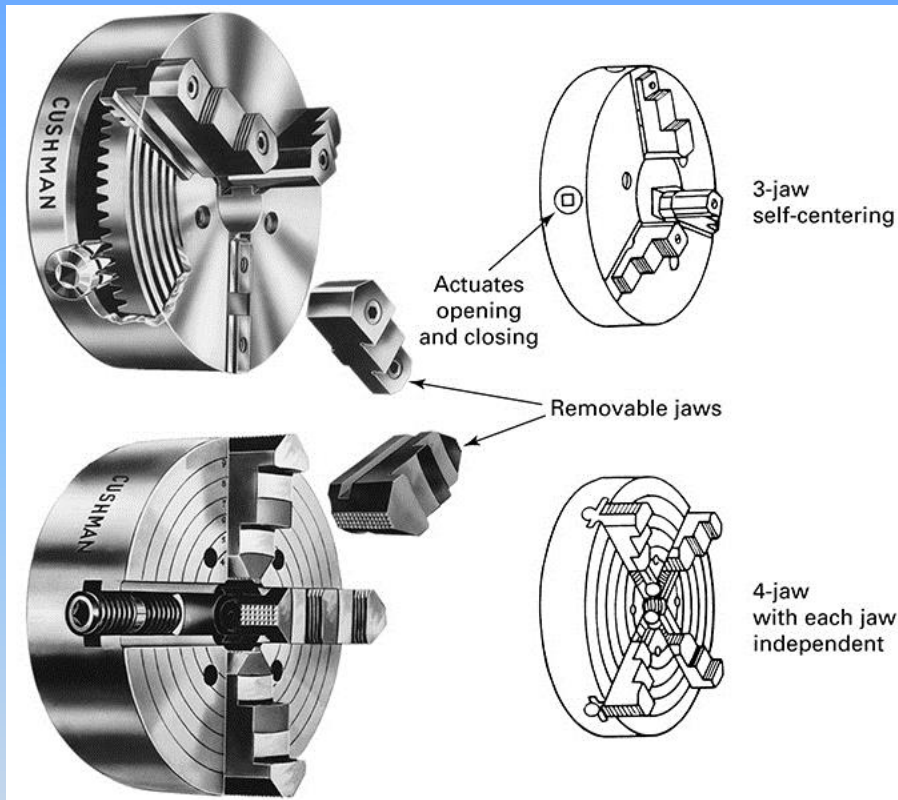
The jaws on chucks for lathes (four-jaw independent or three-jaw self-centering) can be removed and reversed.
